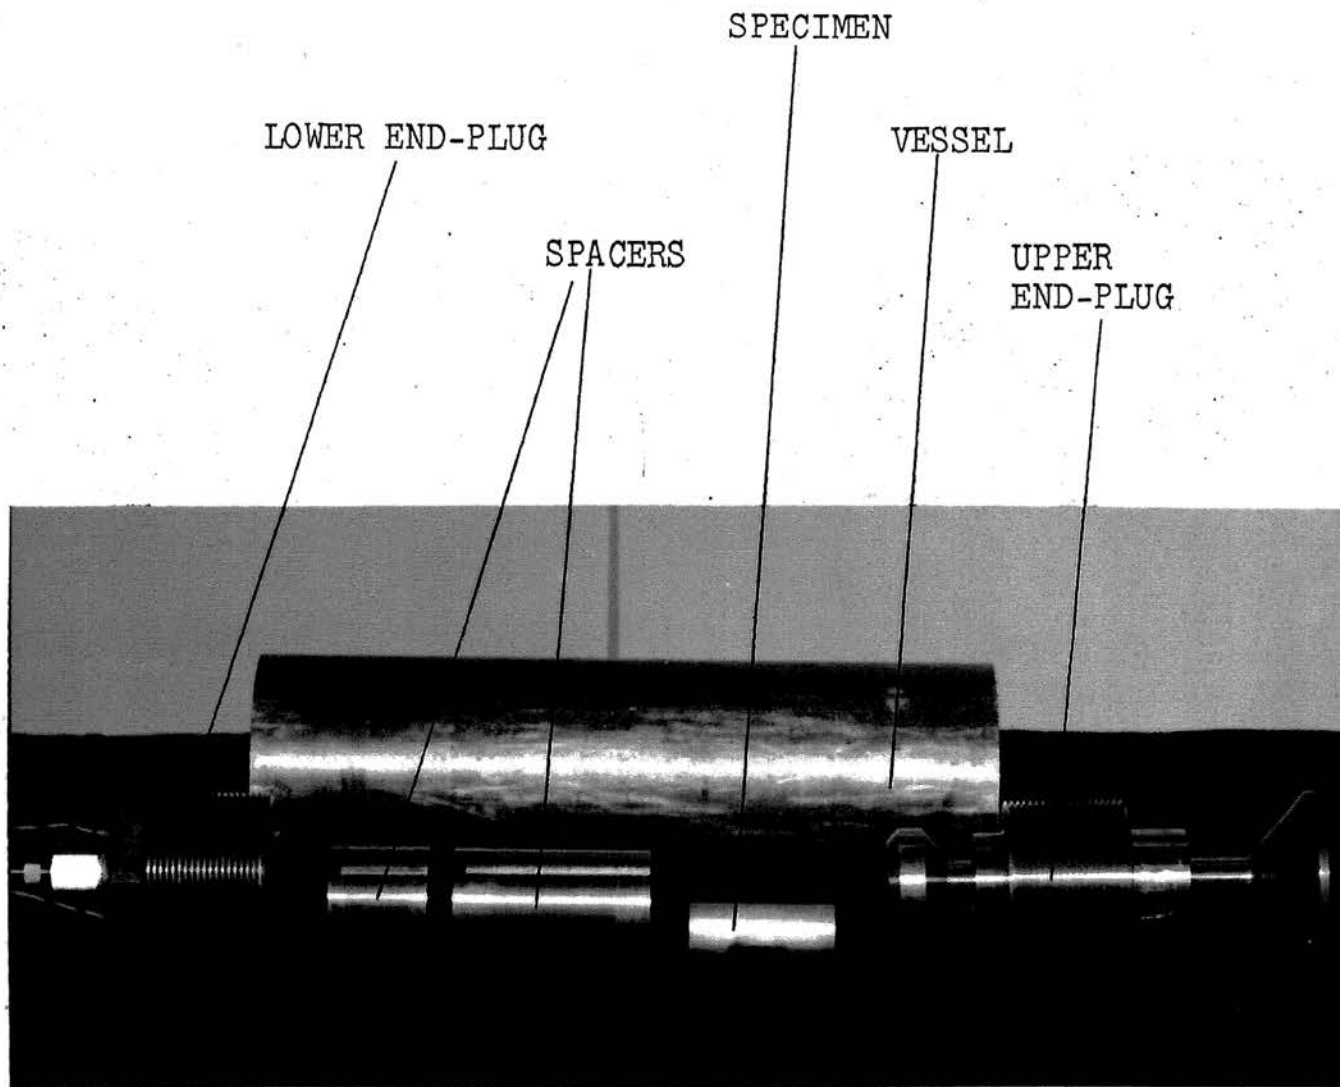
EXPLODED VIEW OF INTERNAL VESSEL PARTS
